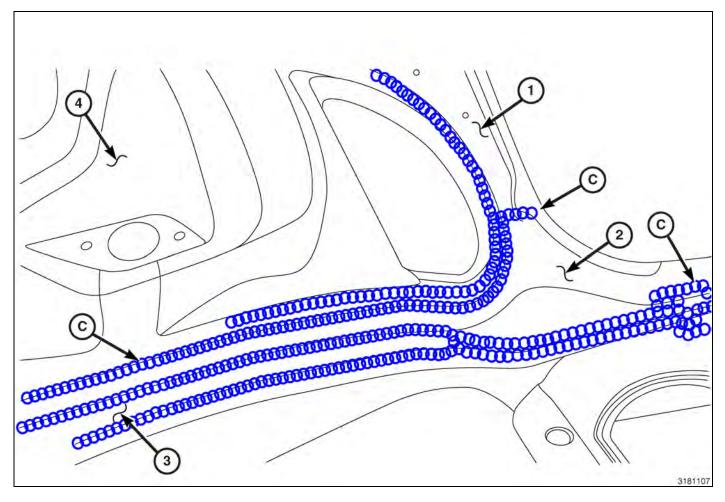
Rear Inner Wheelhouse (2 of 3)
